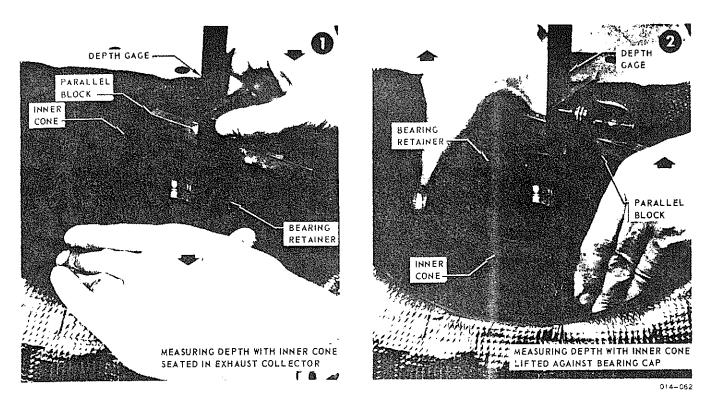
Checking Output Section Bearing Cap to Exhaust Collector Inner Cone Clearance
